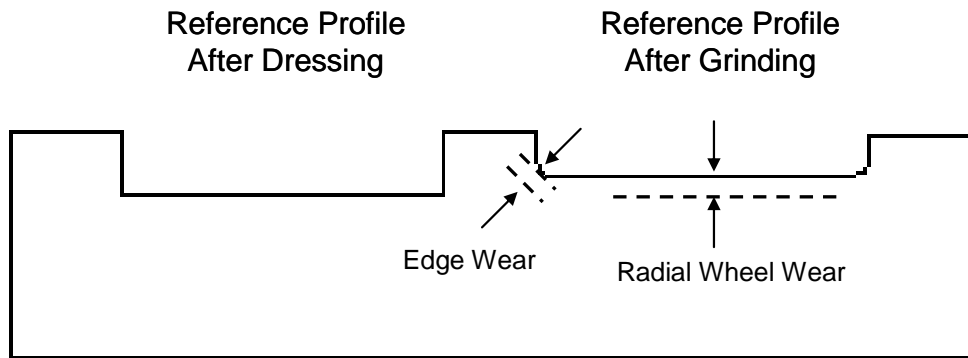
Diagram illustrating the technique and definition of tool wear for the preliminary grinding testing.
